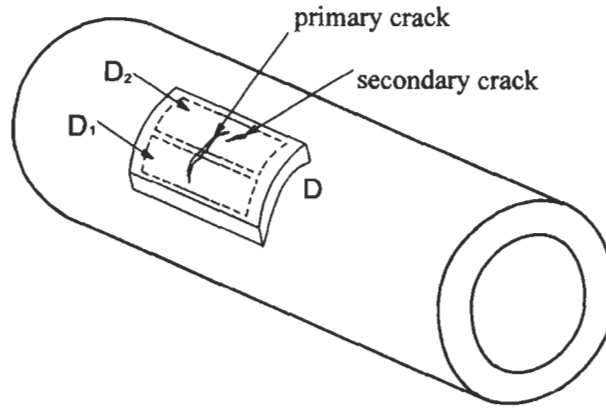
Samples of a cracked radiant tube for failure analysis.
